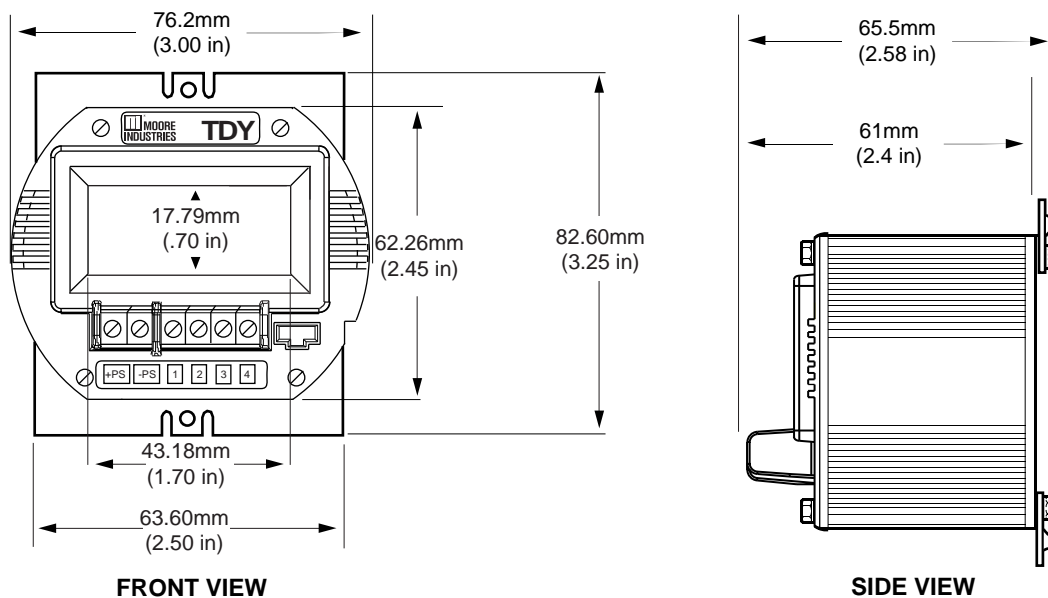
The Dimensions of the D-Box housing for the TDY unit.
